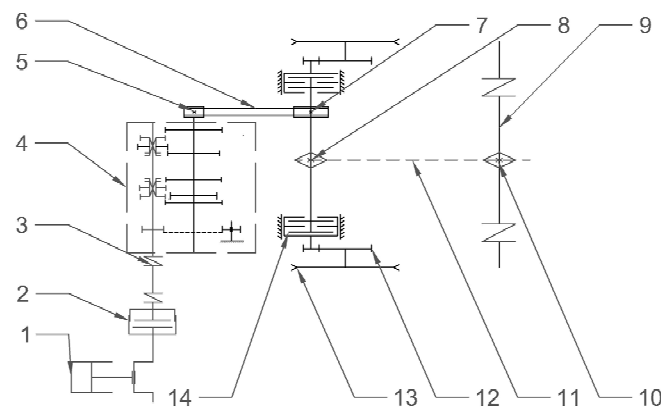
Impetus transmission roadmap: (1) diesel engine; (2) clutch; (3) joint slack; (4) gear box; (5) transmission output shaft pulley; (6) belt; (7) driven pulley; (8) active sprocket; (9) input shaft of the operating device; (10) slave sprocket; (11) double row; (12) drive wheels; (13) rubber tracks; (14) steering clutch.
